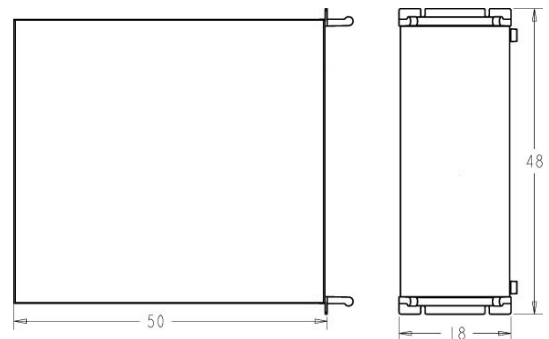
Dimensions of Carmel CFL-05RFF0 controller
